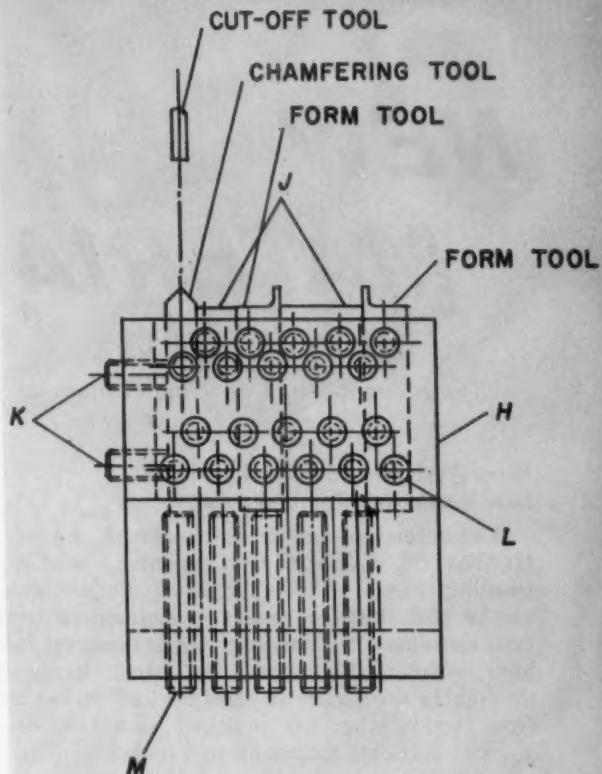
Multiple-tool setup for cutting accurately spaced grooves in shafts.
